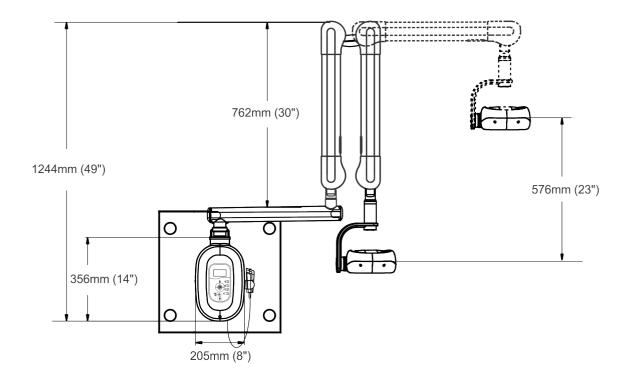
Wall Mounted ImageScan HD Vertically Extended
